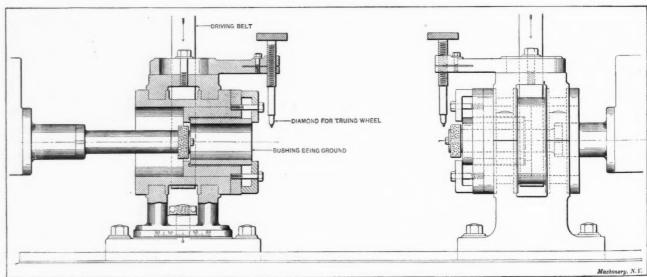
Section and Elevation of Head-stocks and Work and Relation of Head-stocks to the Grinding Wheels
